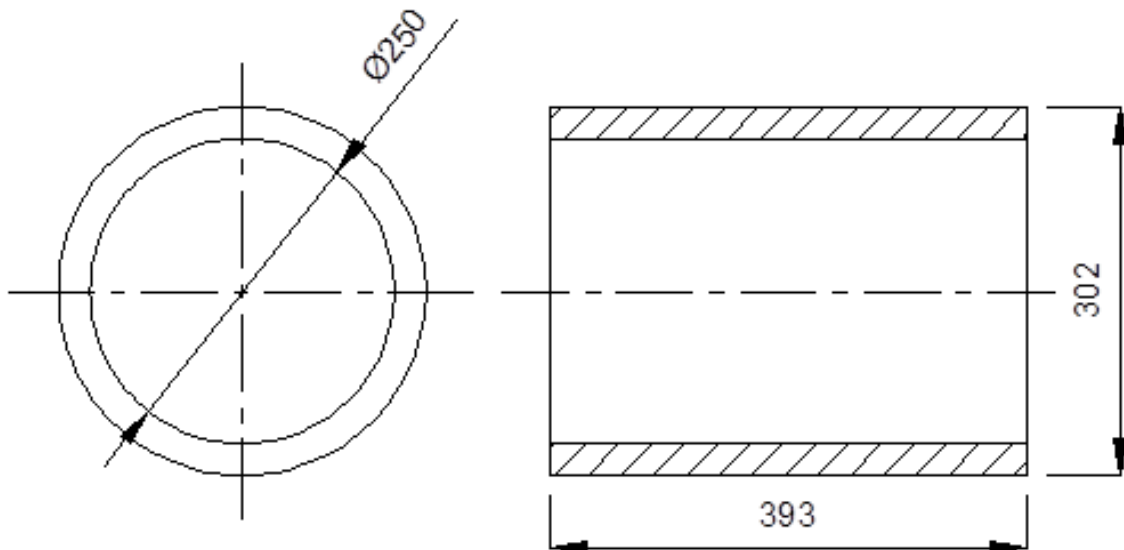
High pressure gas cylinder (all dimensions in mm)
